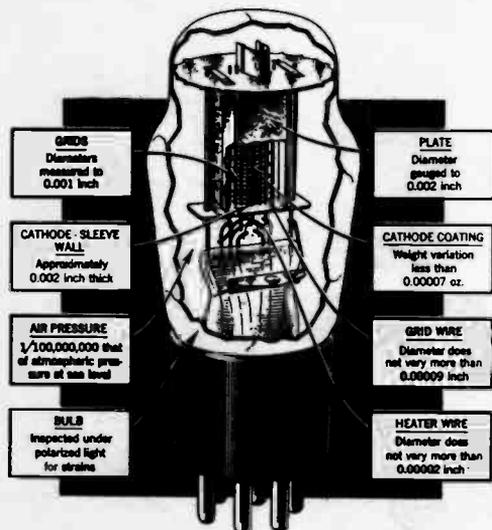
Cutaway view of a four-element glass tube showing internal construction.
